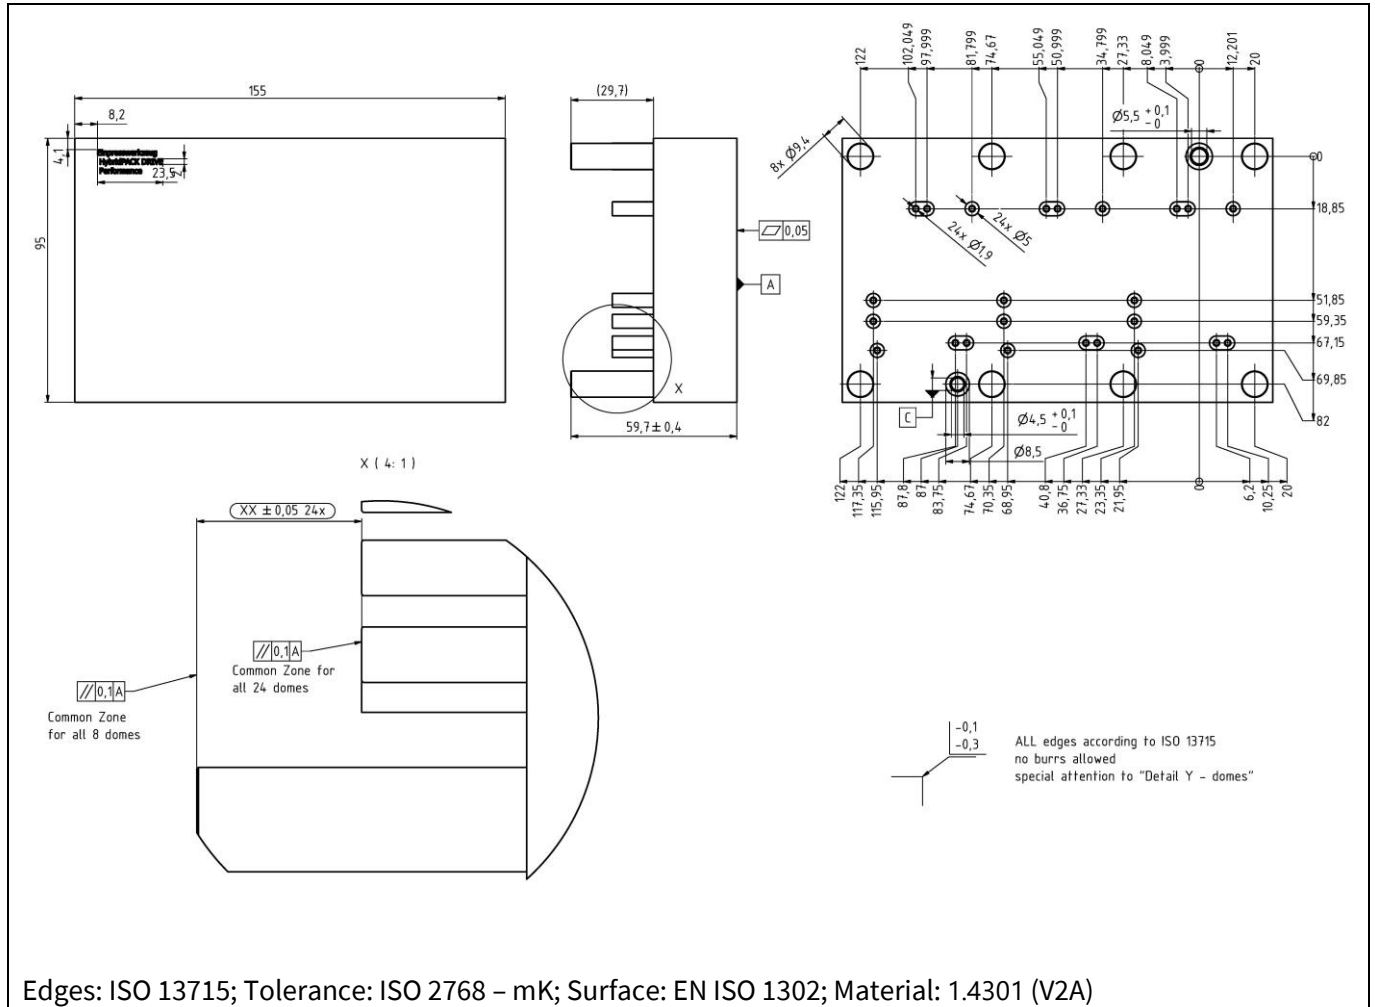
Technical drawing of the sample press-in tool with distance keeper (Top Tool). The shown tool is for HybridPACK Drive modules with silicon IGBTs 750V and 1200V.
